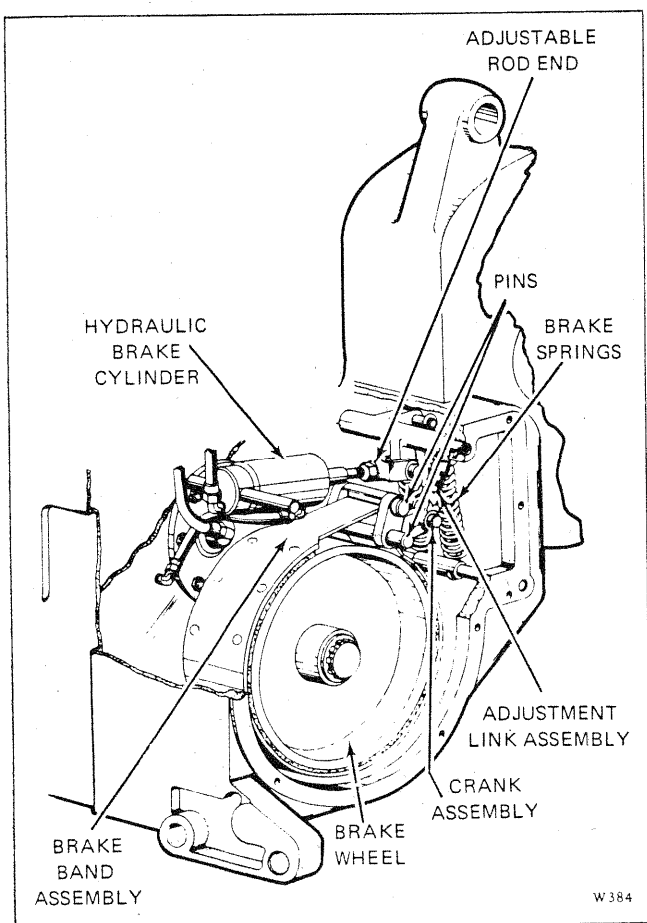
HYDRAULIC BRAKE ASSEMBLY, POWER CONTROLLED WINCH
